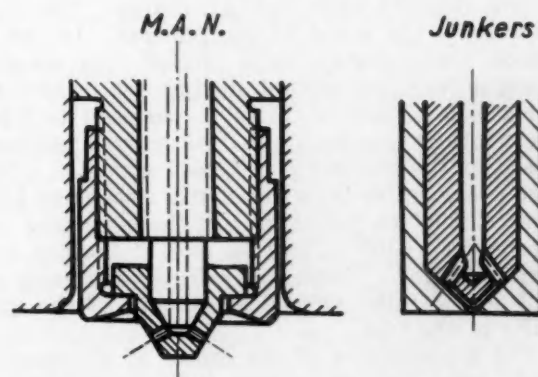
OPEN INJECTION-NOZZLES OF M.A.N. AND JUNKERS ENGINES
